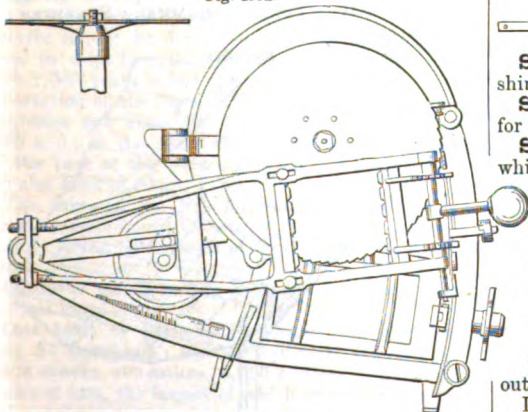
is a machine in which the circular saw and jointer are on the same frame. The block is held by spiked rolls in a carriage which presents the bolt, *butts* and *points* alternately.
